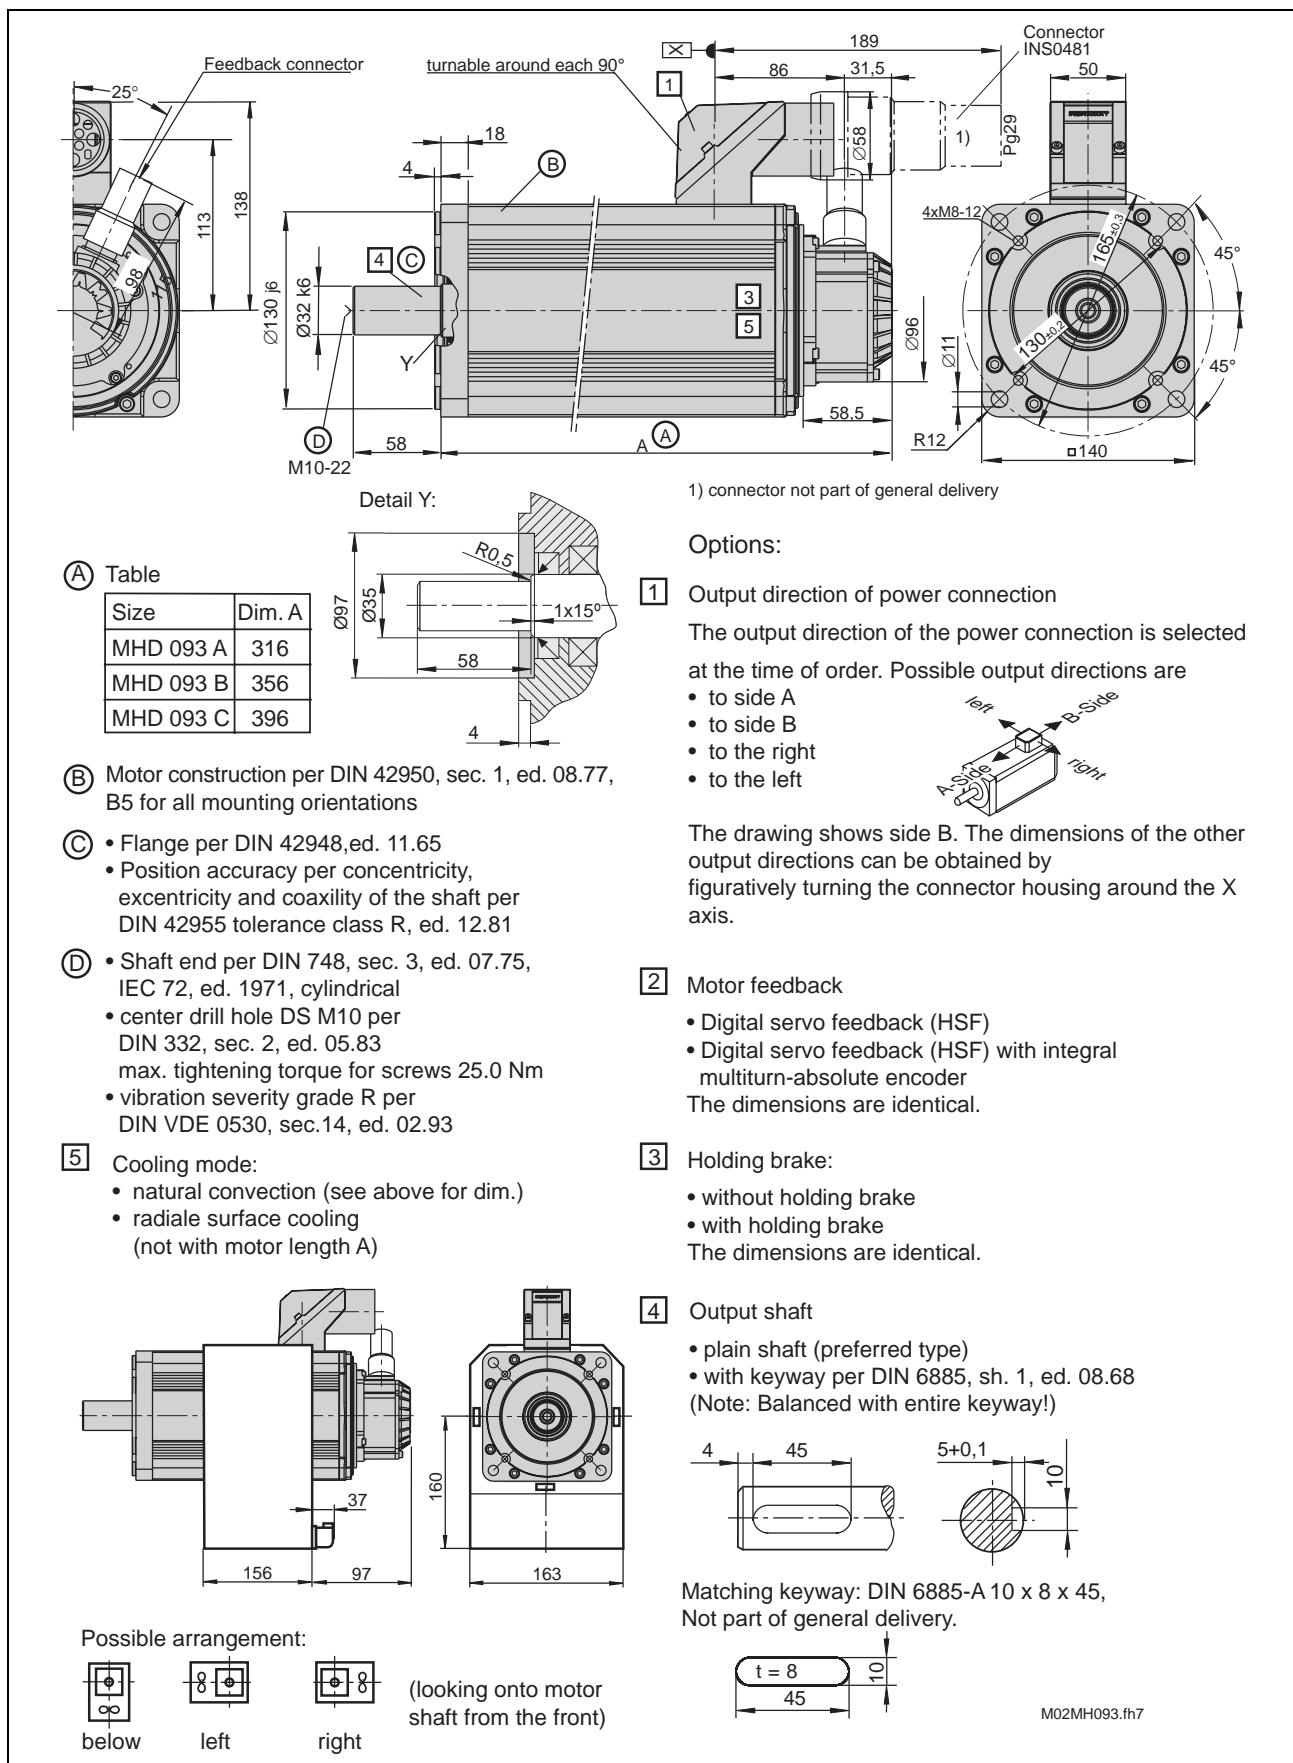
Dimensional sheet MHD093.-...-...-A
